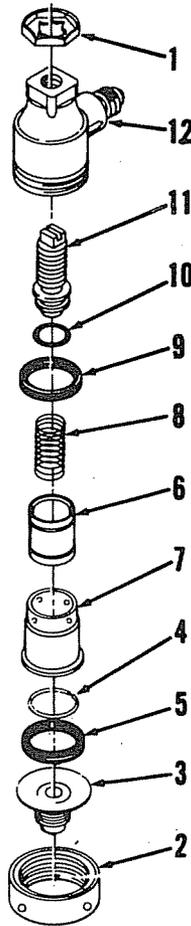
FLOW REGULATOR ASSEMBLY
